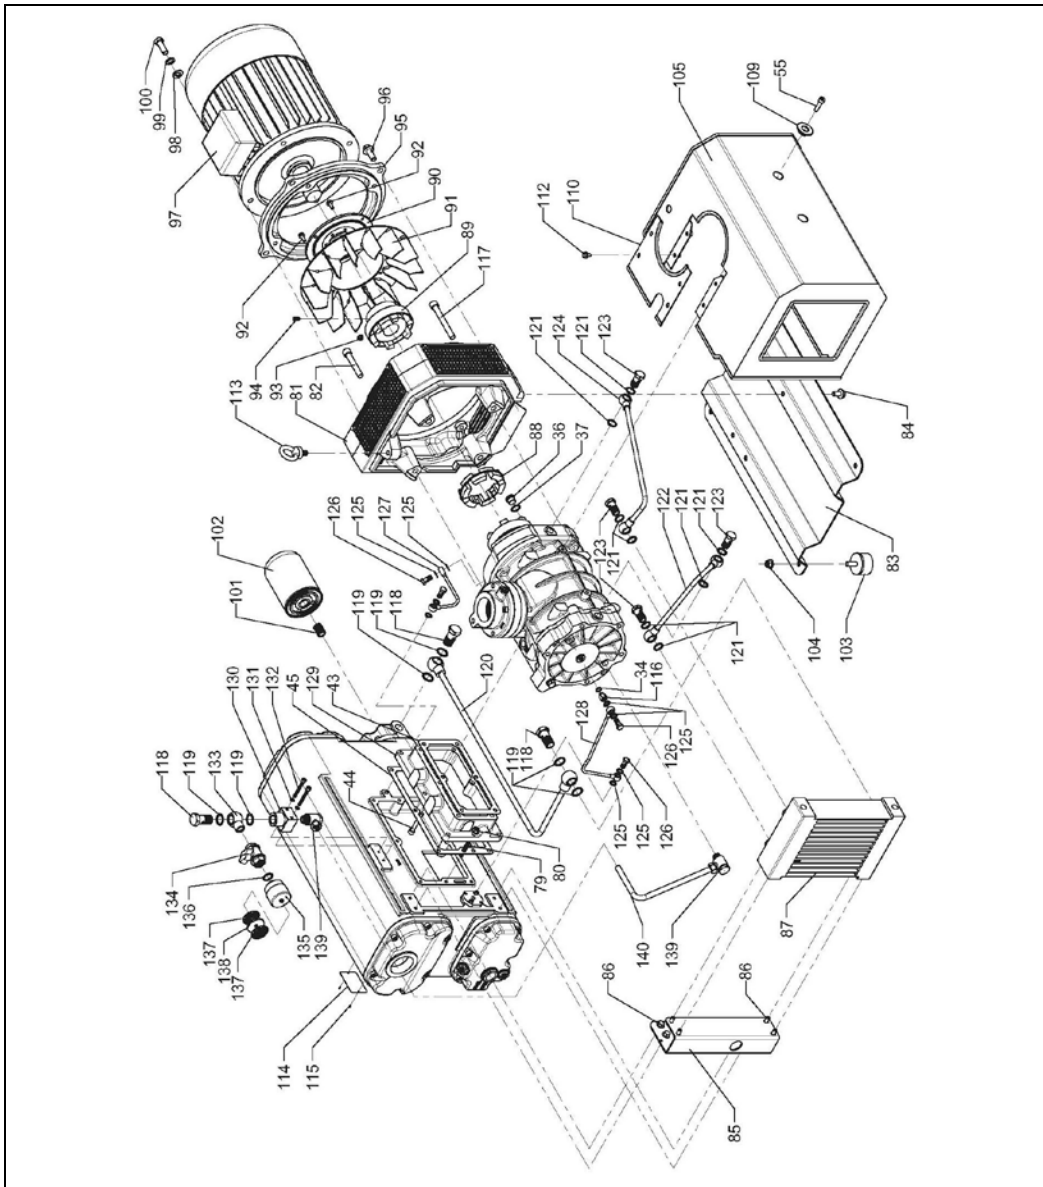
MS-301 Pump parts – Exploded View (1 of 2)
